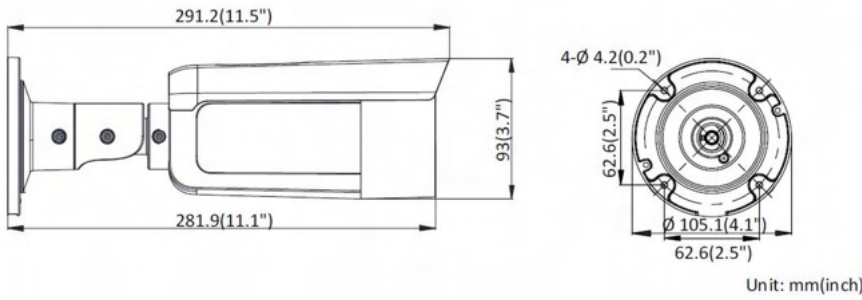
Bullet Cam. Dimensions 1 (A1 Security Cameras, n.d.)
